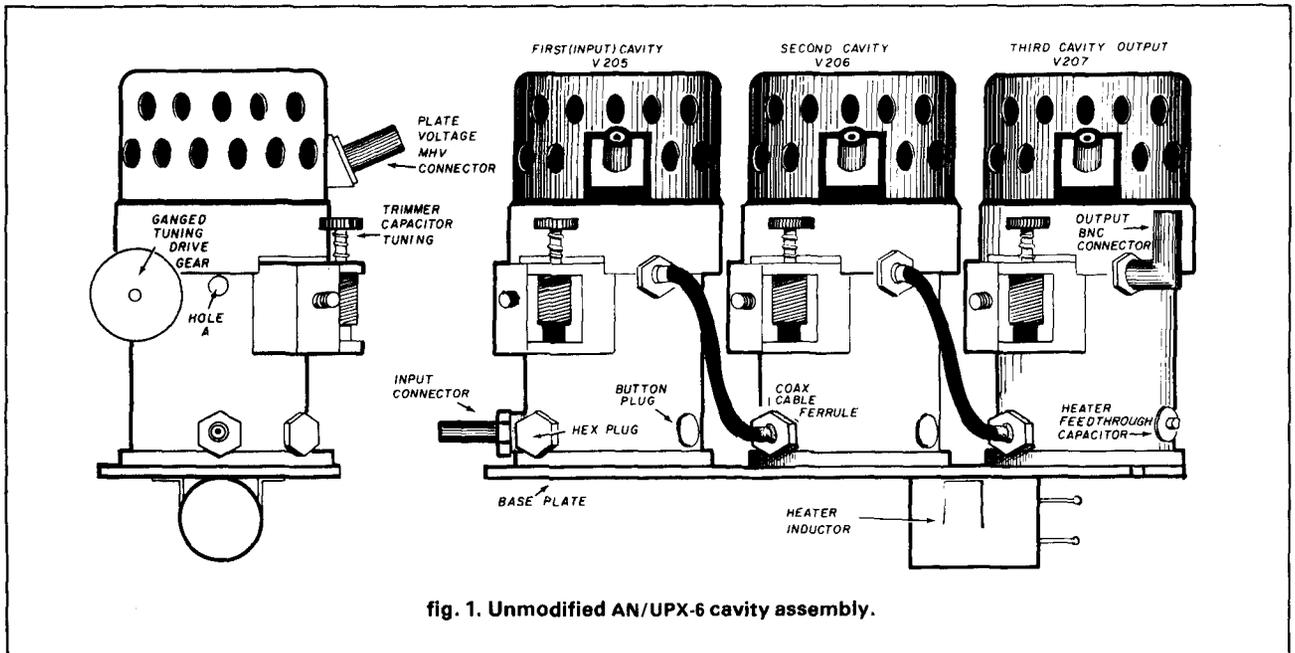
Unmodified AN/UPX-6 cavity assembly.
